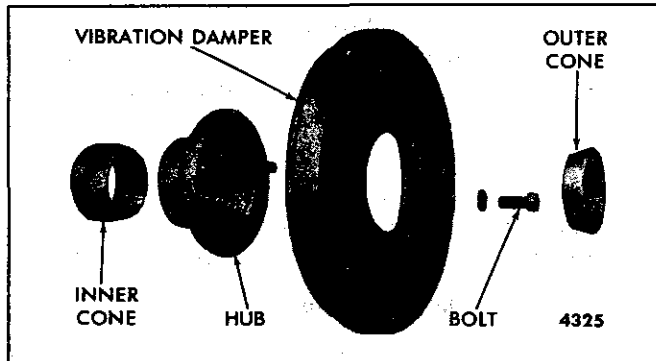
Vibration Damper Details and Relative Location of Parts
